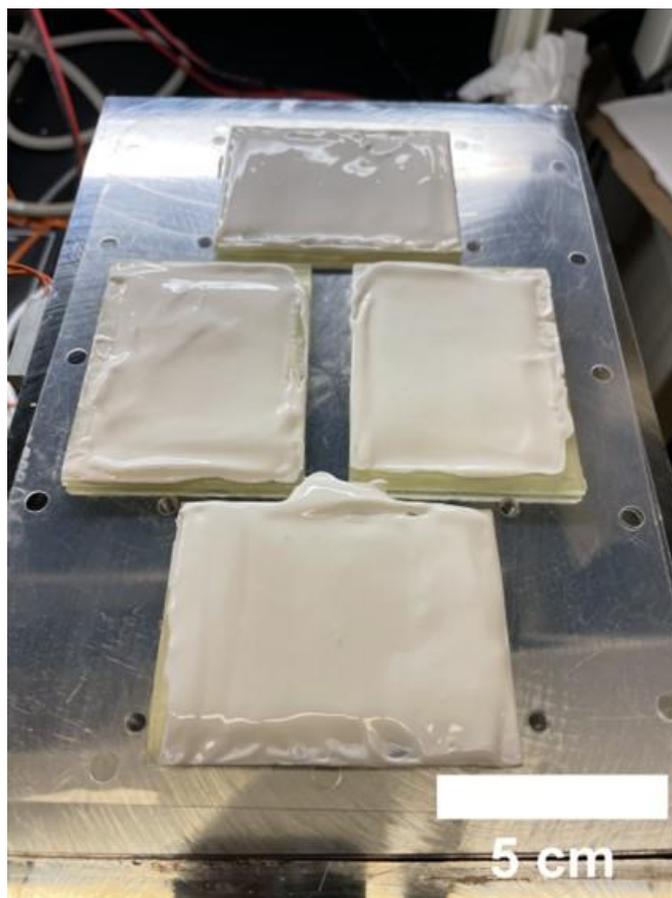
Freeze casting of YSZ slurry into molds on the surface of the thermoelectric cold plate.
